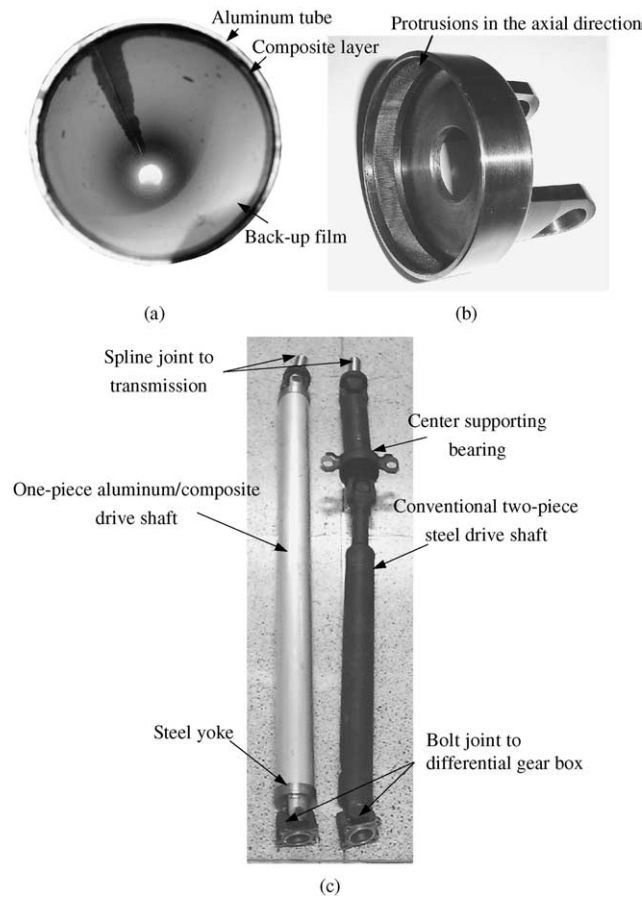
Photographs of the parts of drive shaft: (a) the inner surface of the manufactured aluminum/composite shaft; (b) the steel yoke with protrusions in the axial direction on the inner surface for drive shaft; (c) prototype of the aluminum/composite drive shaft and the conventional two-piece steel drive shaft.
